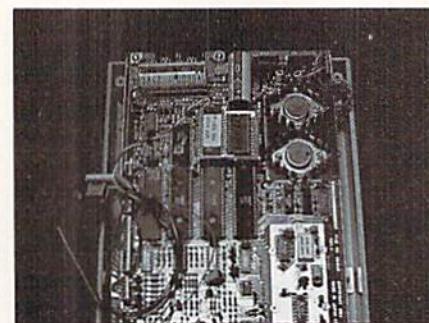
shows the completed installation on the drive, waiting to be tested before reassembly. Selector switches are located on both the drive connector and at the user port connector. Note that you will still have to
